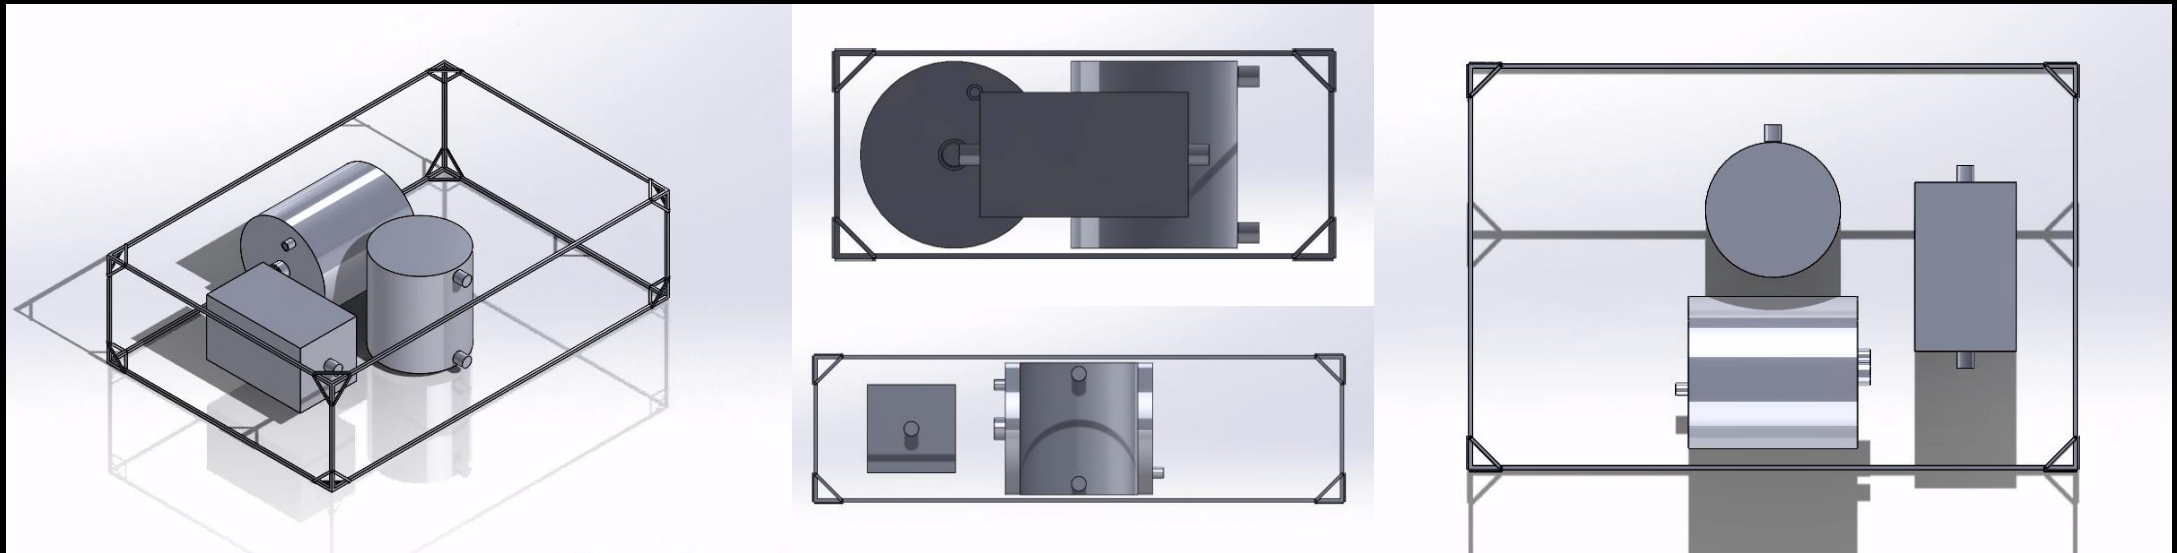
Preliminary Assembly Model (Left): Isometric view, (Top): Right view, (Bottom): Front View, (Right): Top view
